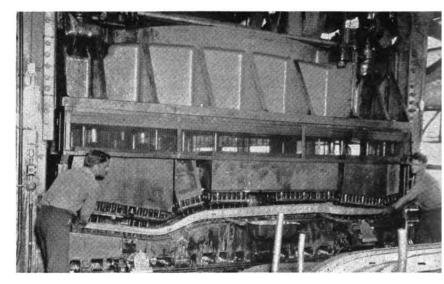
Piercing a side frame member after the auxiliary strip has been welded to it.
